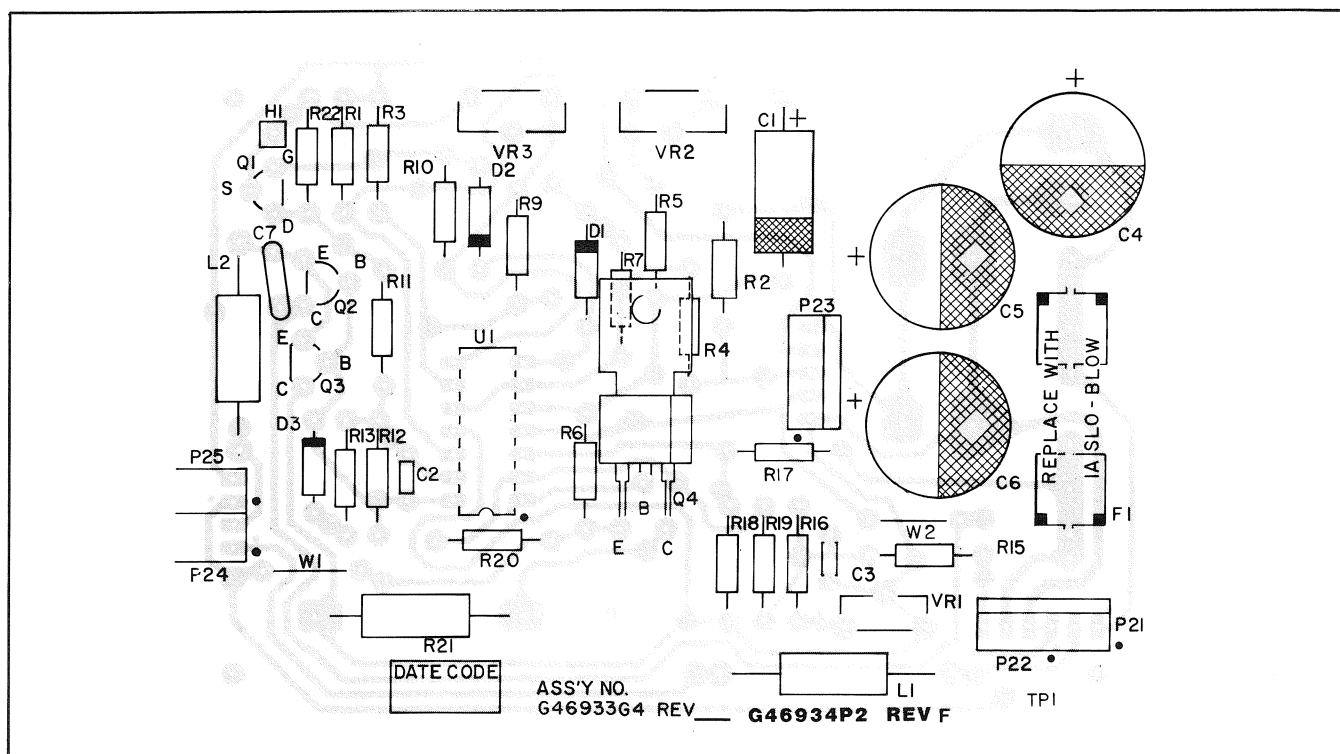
Auto-Focus Driver Circuit Board Assembly
